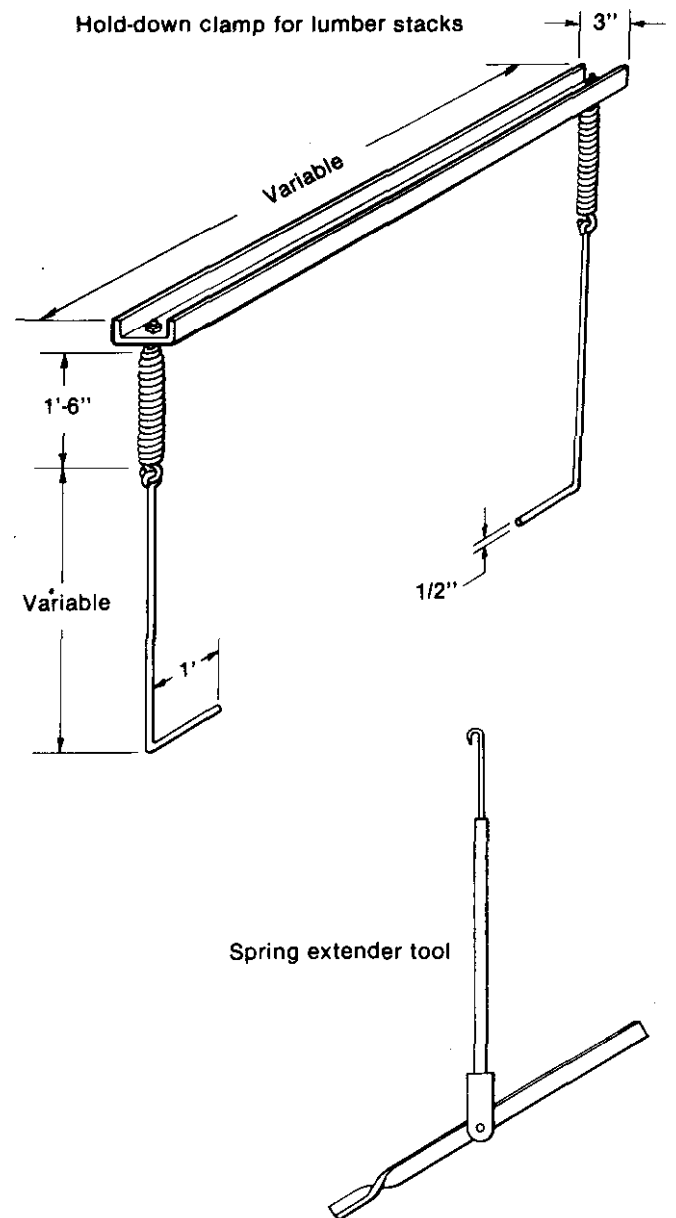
Spring-loaded hold-down clamp for reducing warp in top layers of lumber and spring extender tool. (ML88 5564)
